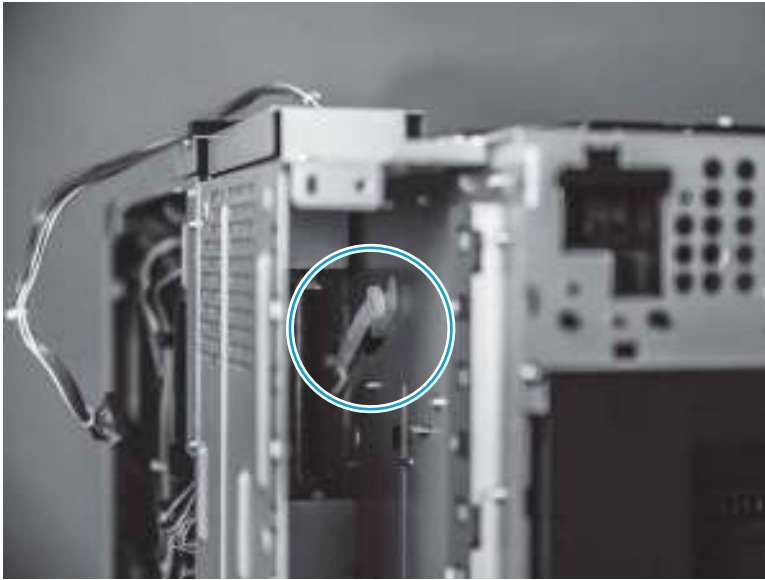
Remove the cartridge-lifter assembly (M806; 6 of 11)
